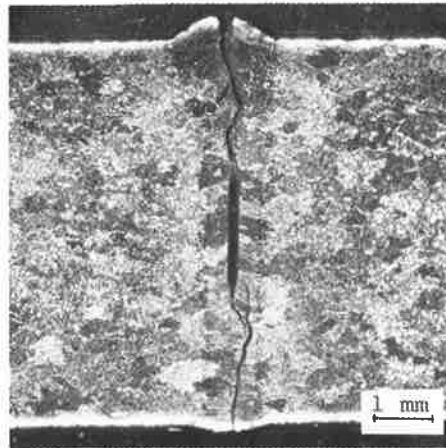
Crosssectional macrostructure of weld bead of PM-Chromium
